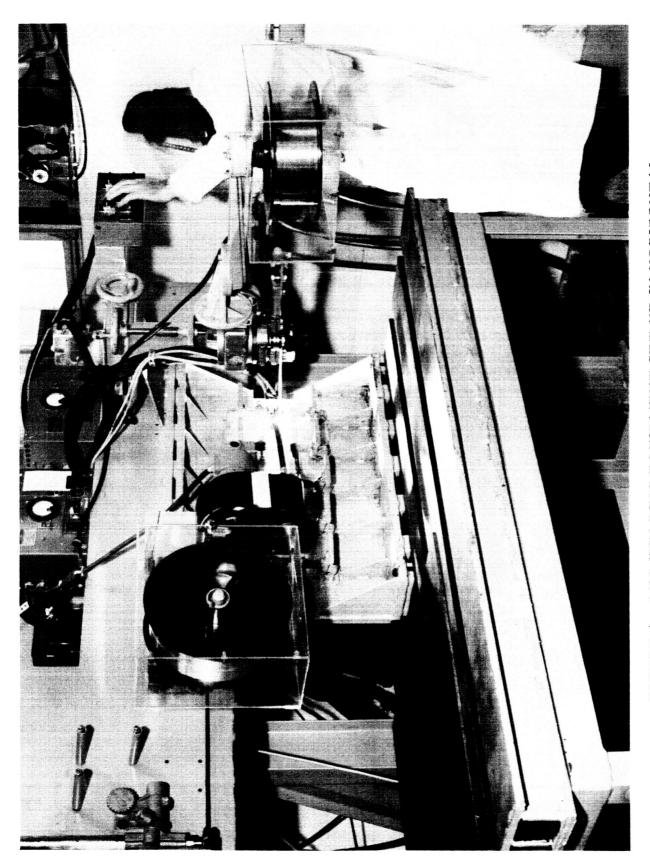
MIG WELDING EQUIPMENT SET UP IN HORIZONTAL POSITION. Note cold wire feed attachments.
